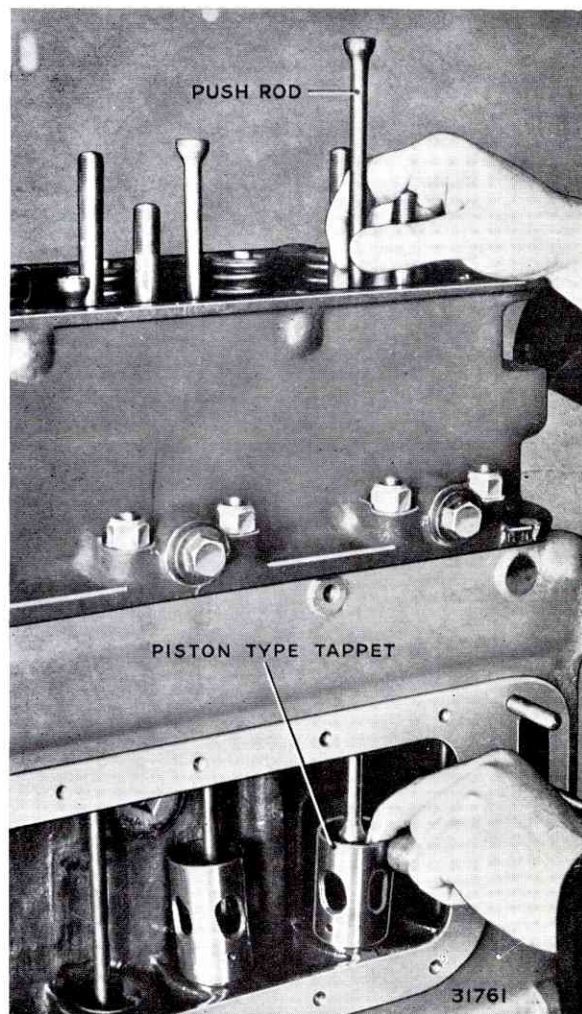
REMOVING PUSH ROD AND CAM FOLLOWER
